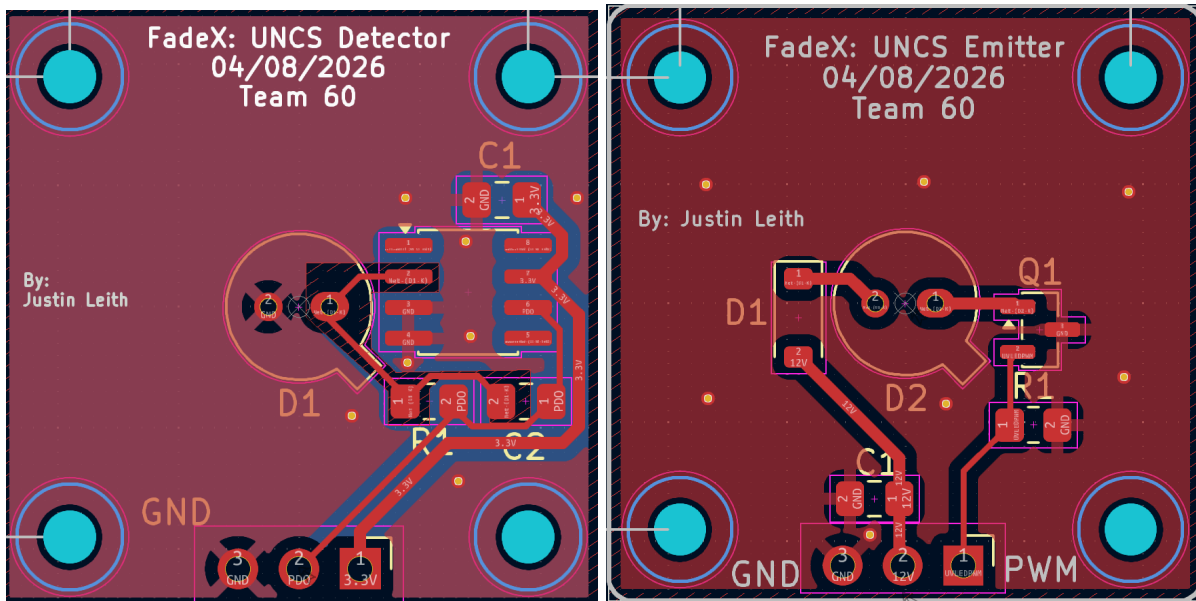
Photodetector PCB (left) and Light Emitter PCB (right)
